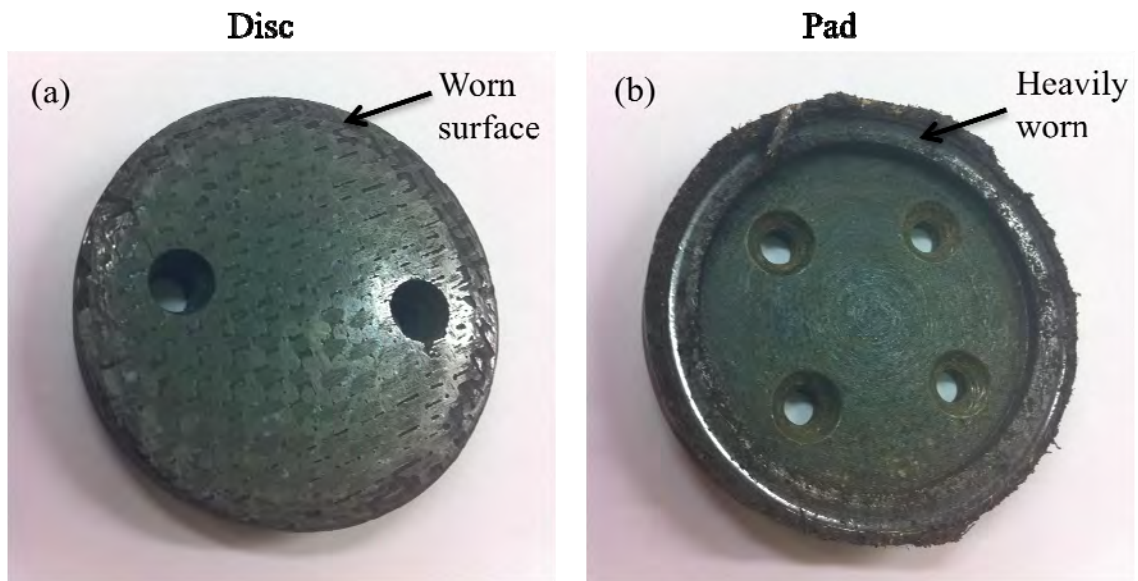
Photographs of (a) 5471-50 and (b) industry standard pad mounted on a steel plate, illustrating the excessive wear of the pad and to a lesser degree, the disc after dynamometer testing.
